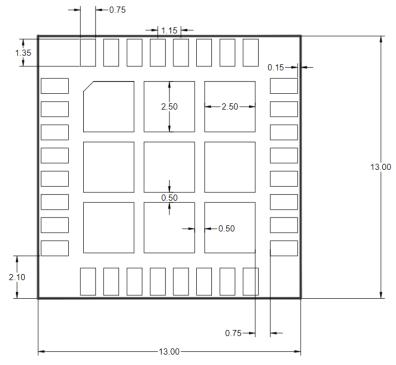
Recommended PCB footprint for shielded HTNB32L-XXX.
